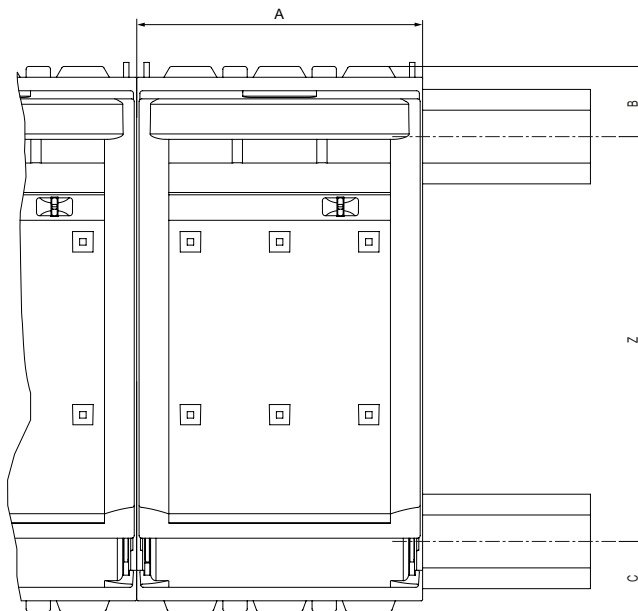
Dimensional drawing: Mounting onto standard rail, 3NP1 size 00
